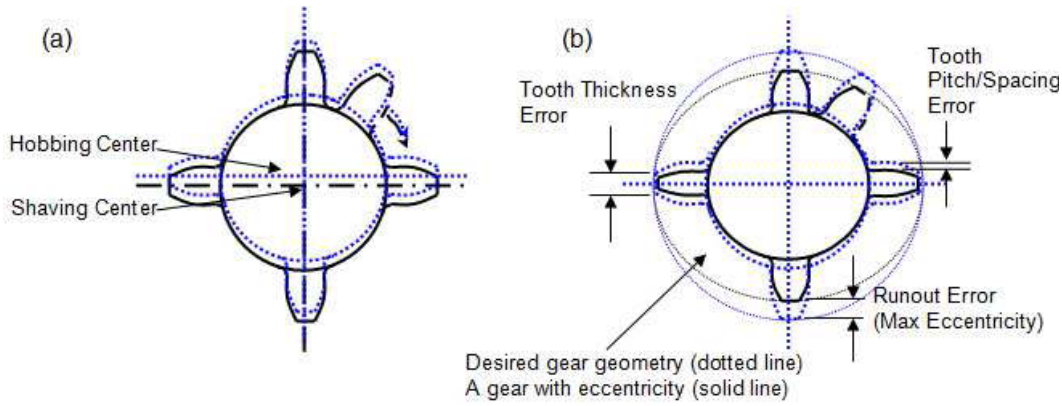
Eccentric gear. (a) Eccentricity in a gear caused by manufacturing errors, (b) Resulting errors in gear geometry [90]
